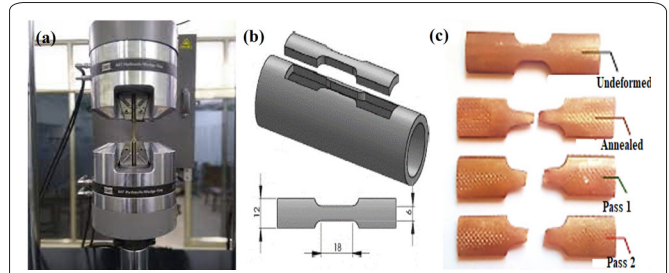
(a) Uniaxial tensile test machine, (b) ASTM E8 standard I-section for tensile testing, and (c) I-sections of copper tube test specimens.
